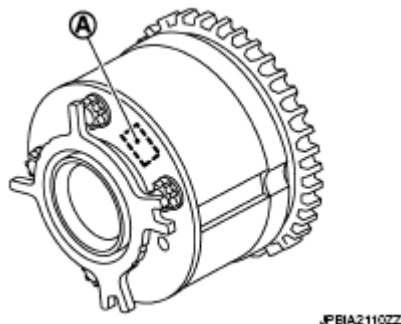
Identifying Camshaft Sprockets Identification Mark
